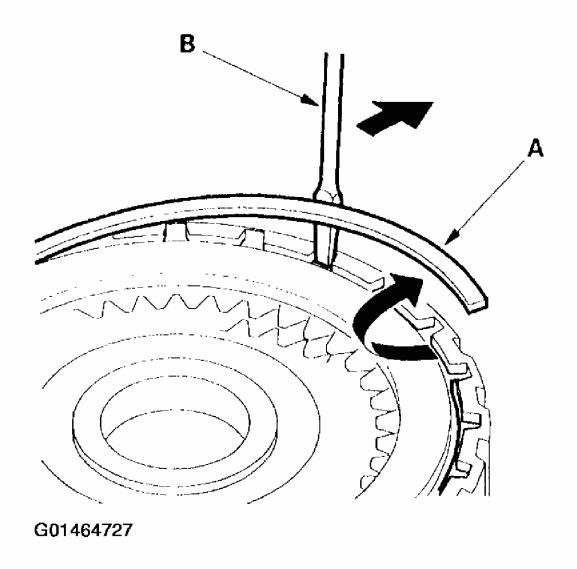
Removing The Snap Ring Courtesy of AMERICAN HONDA MOTOR CO., INC.
